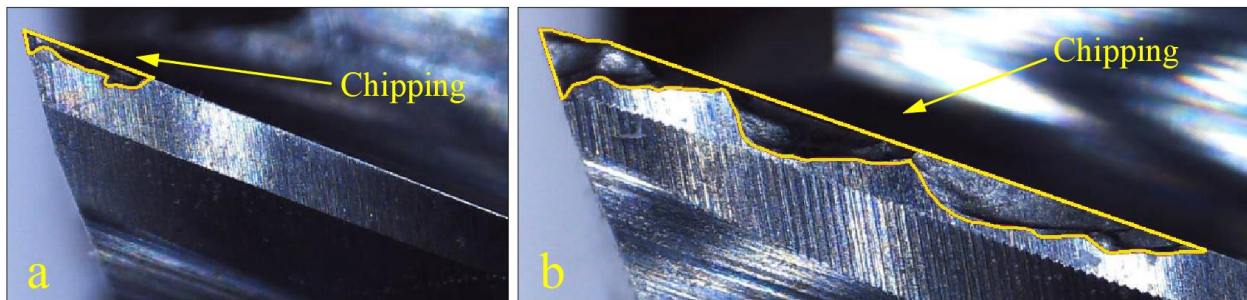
(a) the chipping on the tool #2 after cutting 2 inches of workpiece (b) the chipping on the tool #29 after cutting 2 inches of workpiece.
